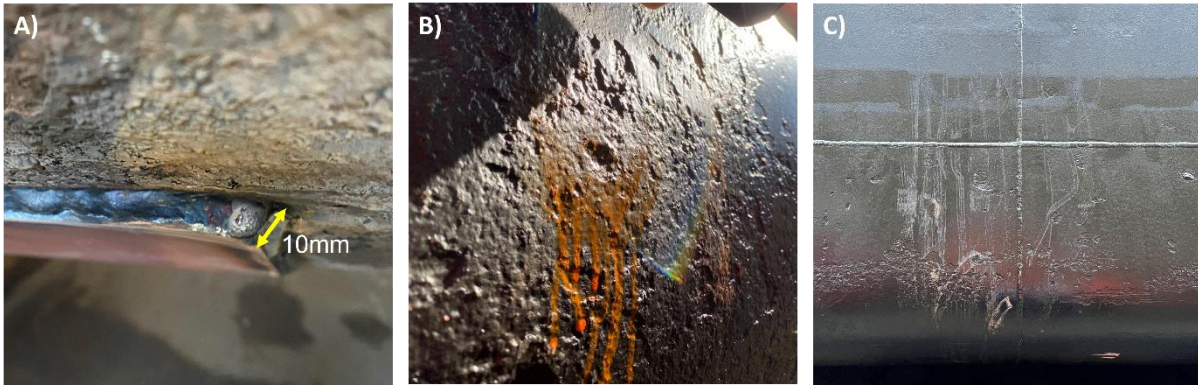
Hull surface structures encountered by the crawler system: A) Steel plates pre-paint coating (thickness ~10 mm), B) high levels of corroded surfaces creating small craters and uneven surfaces, C) vertical and horizontal welding seams (height ~5 mm).
